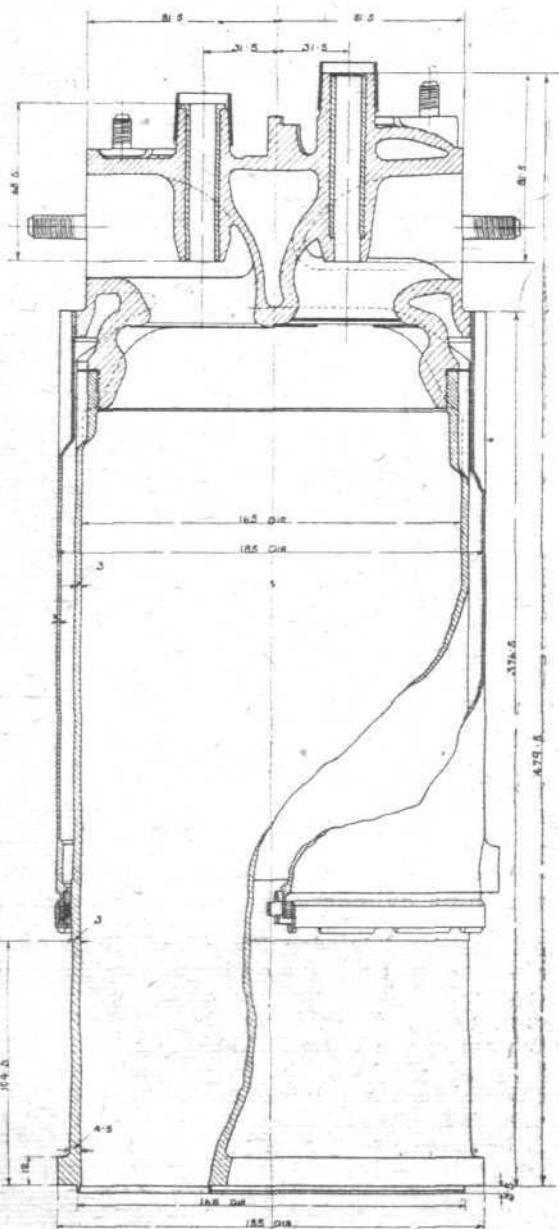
Cross-section of cylinder through inlet and exhaust valves, and section of cylinder barrel and water jacket on cylinder central axis.
